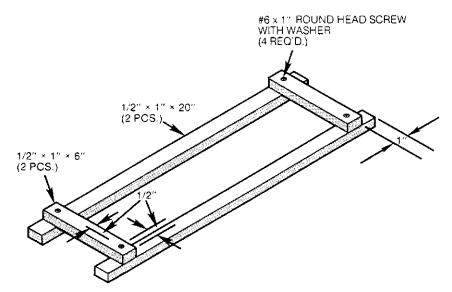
Construction details of a parallel rule that will be used to determine the position of the guide strip.
